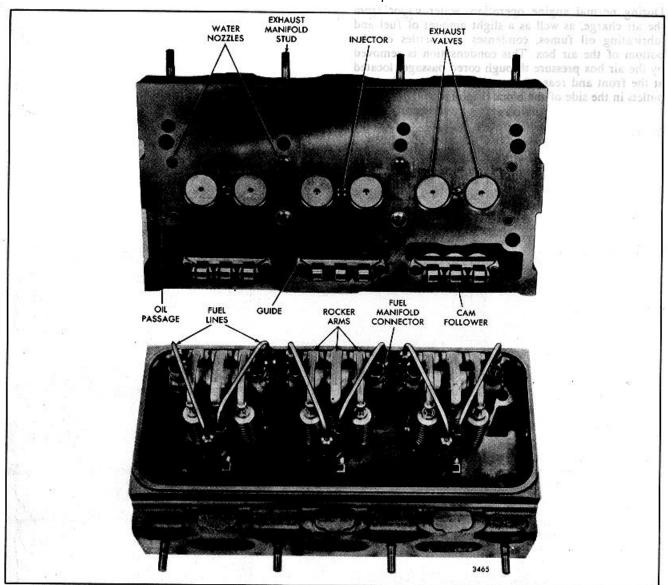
Typical Cylinder Head Assembly (Two-Valve)
